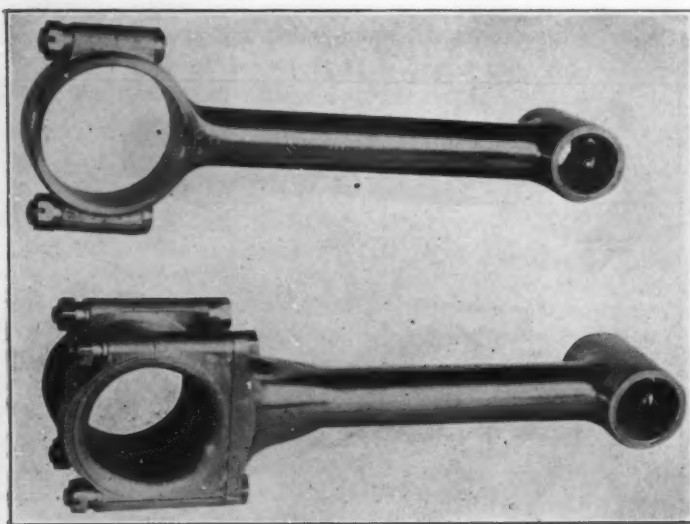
THE CONNECTING-ROD DESIGN USED IN THE E-4 ENGINE. In This So-Called Marine Type the Forked Rod Carries a Babbitt-Lined Bronze Box-Bearing on the Crankpin and the Blade Rod Bears on It. The Principal Difficulty Experienced with This Construction Was Due to the Flexing of the Bronze Shell Which in Turn Disintegrated the Babbitt Lining
